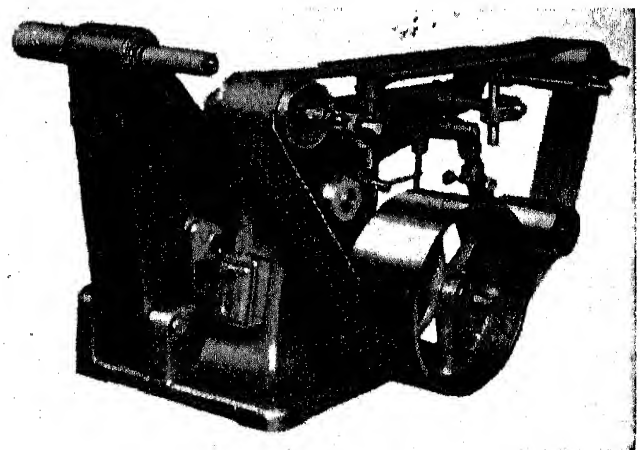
A variety belt grinder. (Courtesy Mattison Machine Works.)
